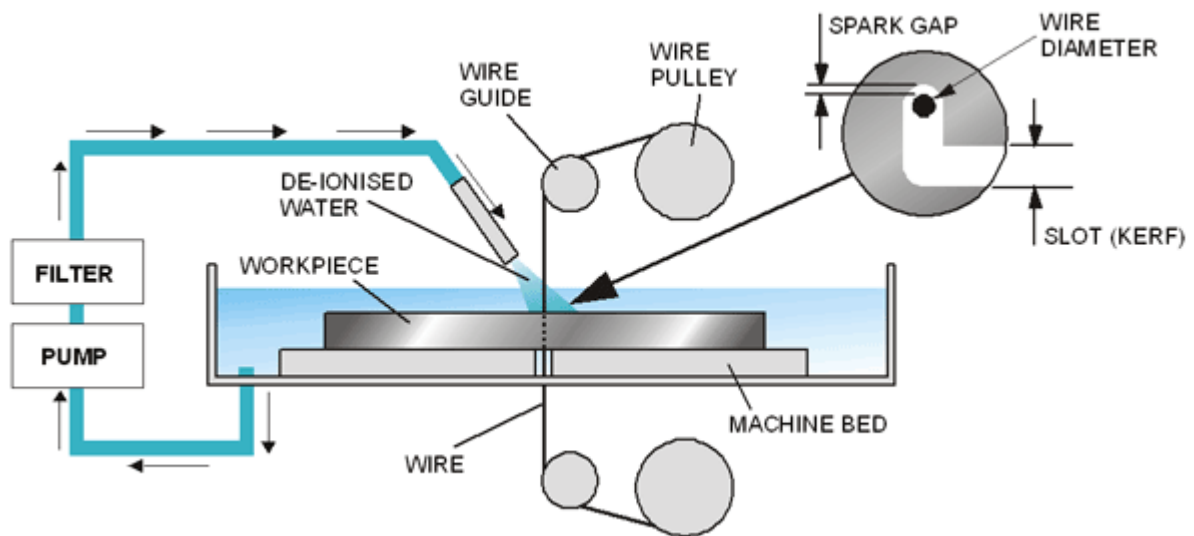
3 wire cut EDM (Manufacturing Technology, M.adithan 212)
